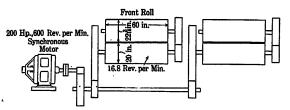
Schematic Arrangement of Two 60-in. Mills with Coupled-Type Synchronous Motor
